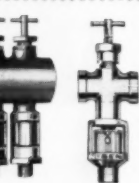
Sight Feed Valves with removable glass. 1/4" to 3/4" IPS.
